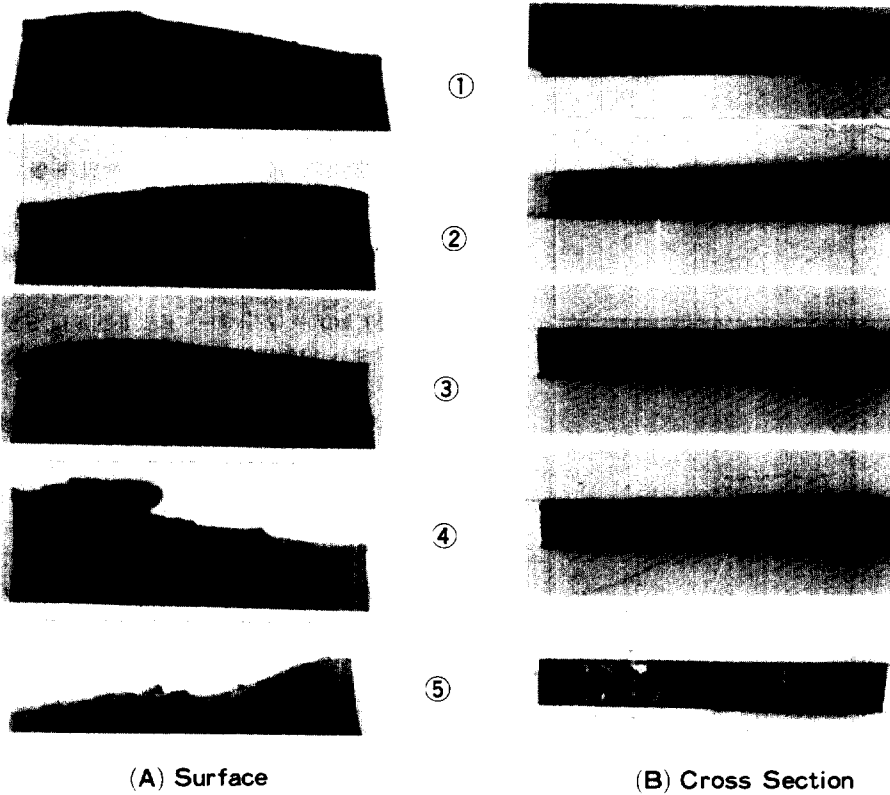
Surface & Cross Section of Cracked and Fractured Specimen
